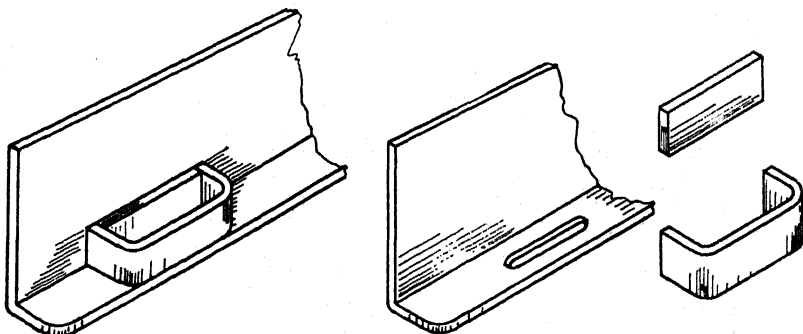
Detail of a holding down bolt hole where some adjustment of the part is required. This provides a simple, low cost construction of pleasing appearance.
